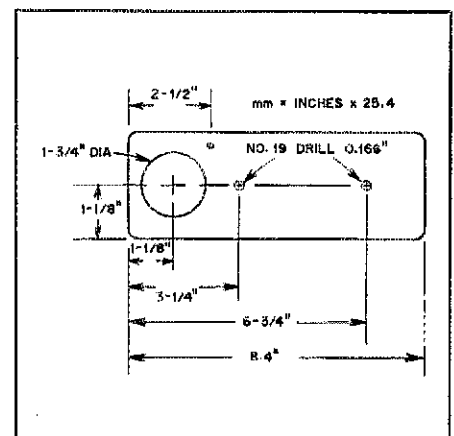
Dimensions of the plate line are given here. The line may be constructed from 1/16-inch (1.6-mm) thick copper or brass. Corners of the line should be filed to give a 3/16-inch (5-mm) radius.
